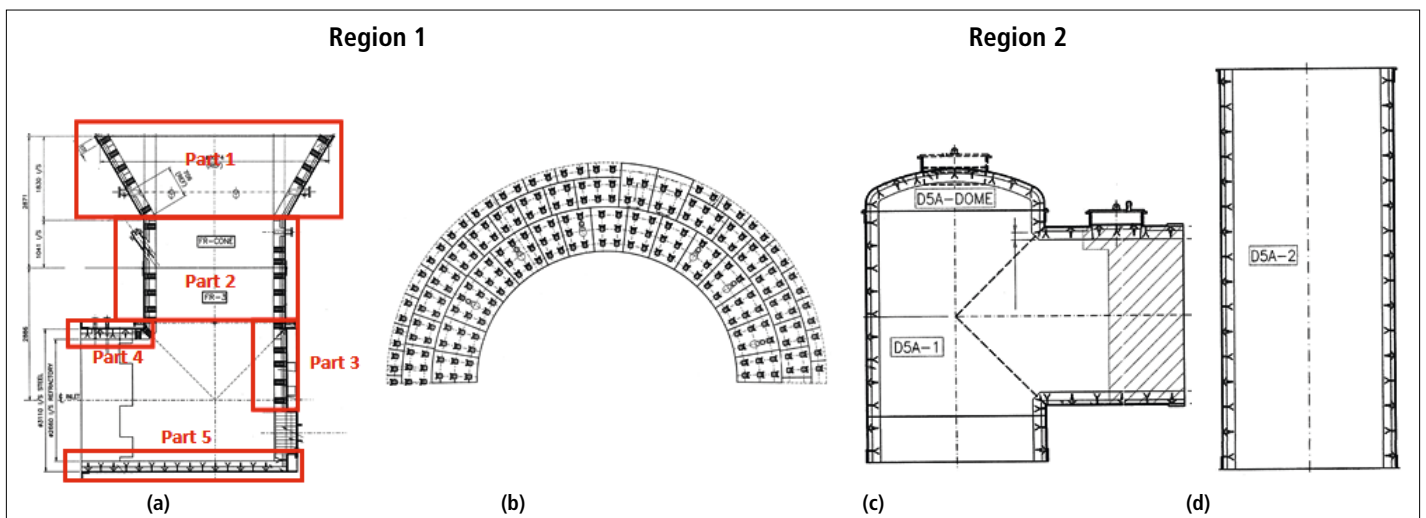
d Cross-section of Region 1 and its different parts (a), schematic view of the anchor distribution at the conical part of Region 1 (b), side view of the top (c), and side view of the bottom part of Region 2 (d)
